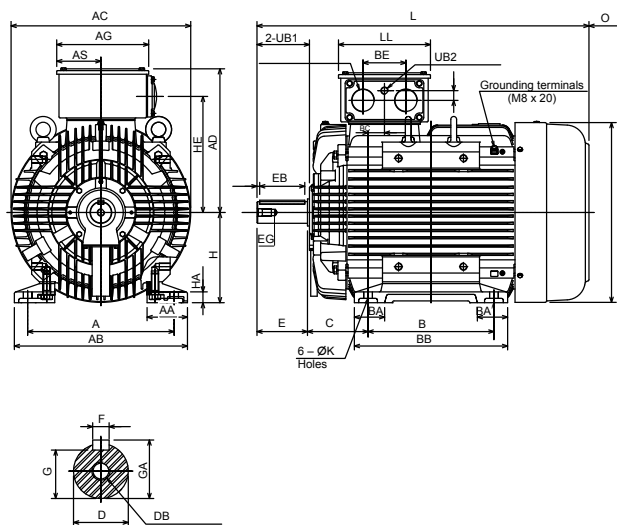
Outline drawing of cast iron design, feet version, mounting B3; frame size 200 – 250 (sample)
